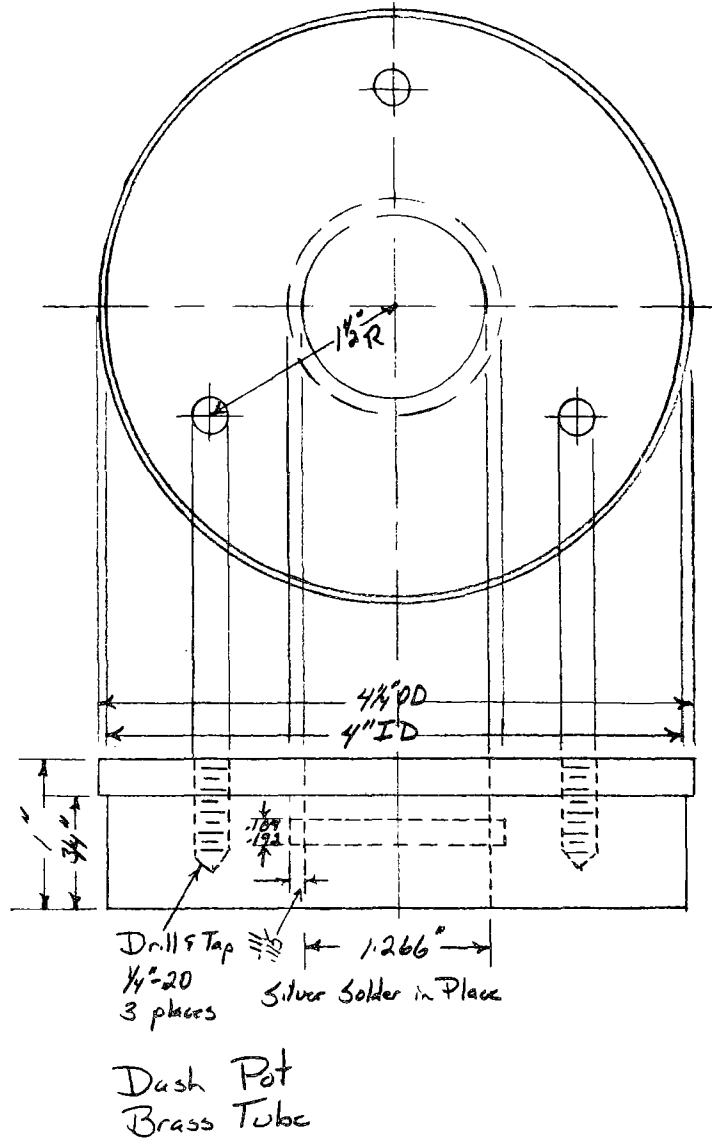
Detailed drawings of the dashpot showing the bottom end which is bolted to steel plate center piece.
